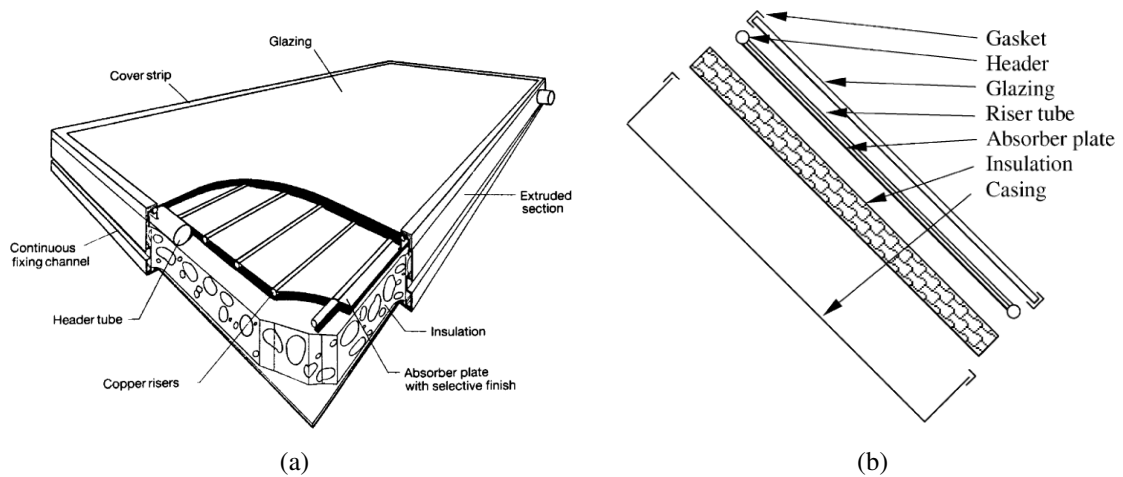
Flat plate collector. (a) Pictorial view [20]. (b) Exploded view [20].
